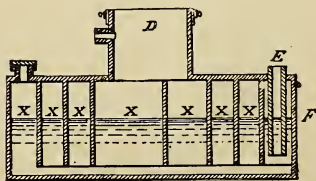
SECTION OF CARBURETOR FOR GASOLINE USE.
